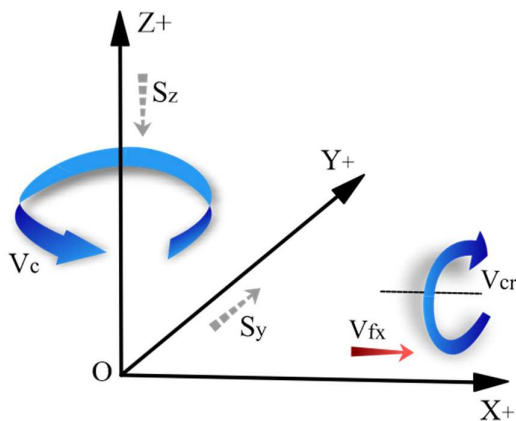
Unconventional tangential cutting scheme realized on CNC vertical machining center RAIS M550
